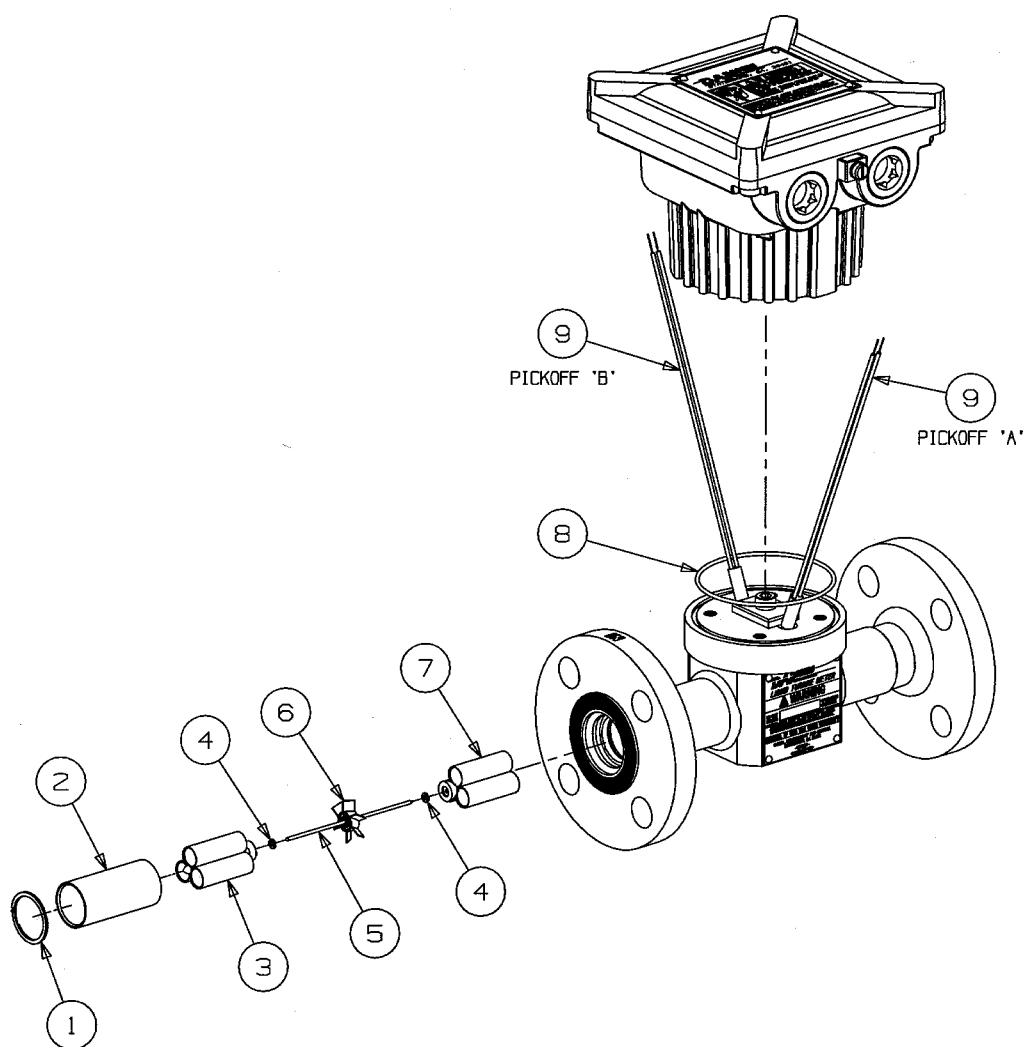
Internal Components 1" Series 1500 Turbine Meter
